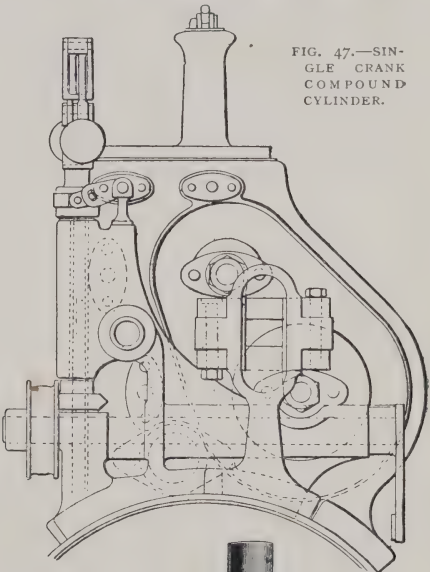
SINGLE CRANK COMPOUND CYLINDER.
